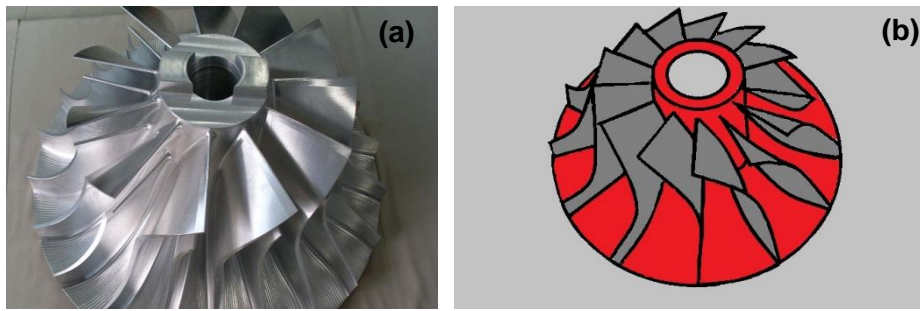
(a) Single-stage air compressor rotor. (b) Single-stage air compressor rotor indicating the different sections to be investment cast and additive manufactured (red = IC, grey = AM)
